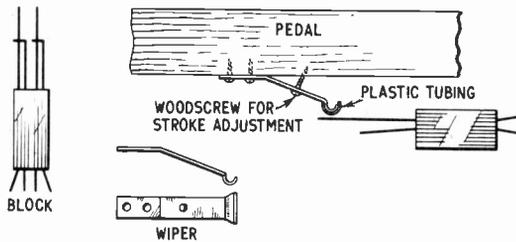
Contact block and wiper used in pedal note switching. Note the inclusion of the stroke adjusting woodscrew which makes for switching precision
